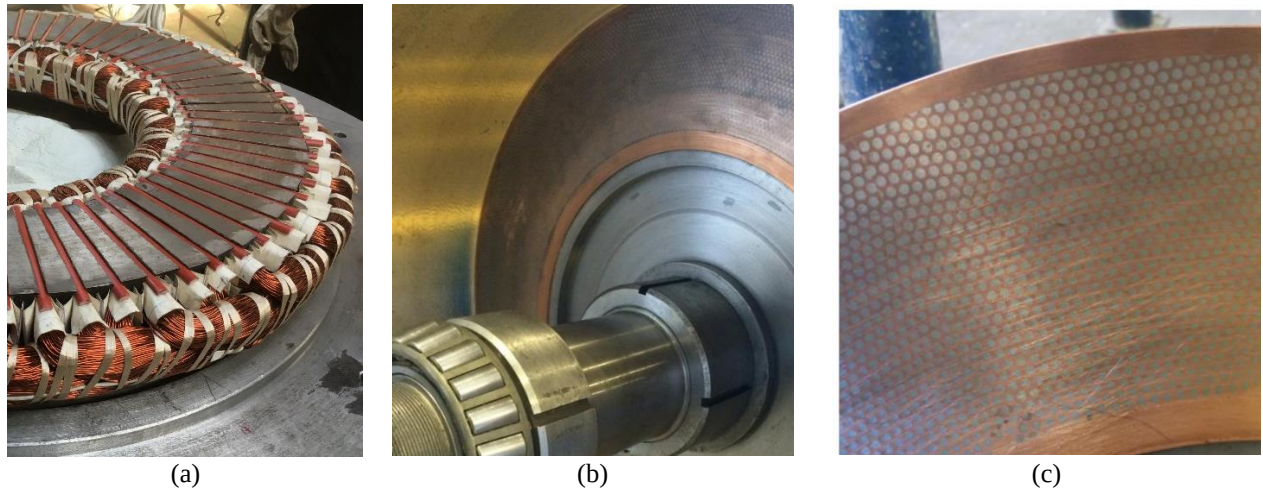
Manufactured parts of the AF-MRIM prototype.
